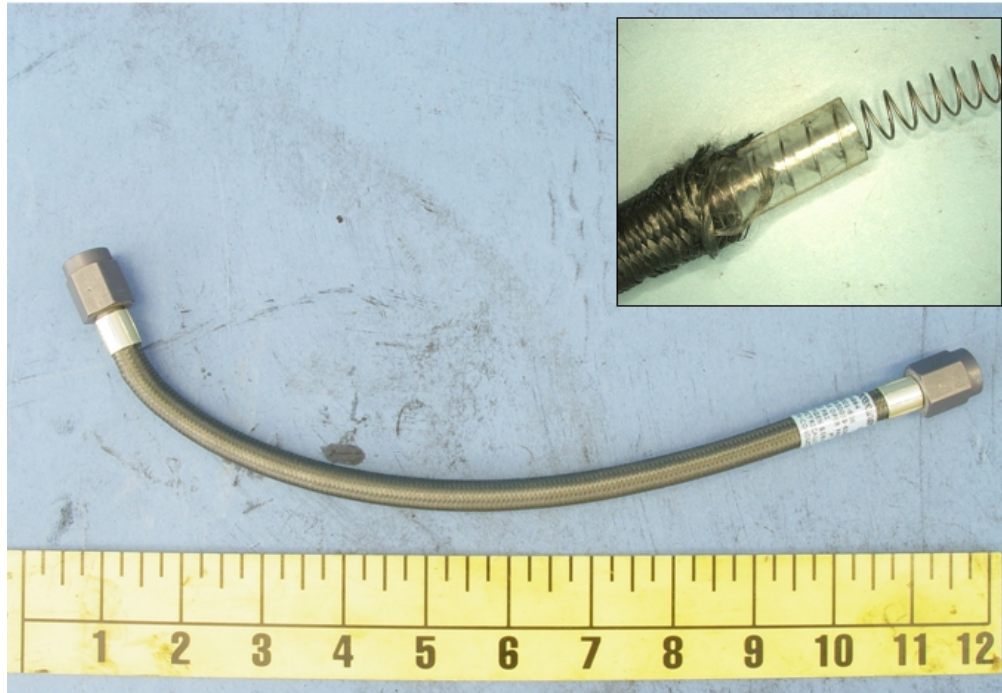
Exemplar flexible hose assembly. Inset shows flexible hose assembly construction.
